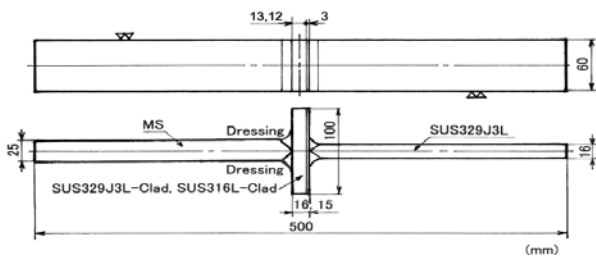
Shape and size of fatigue test specimen (Load-carrying full penetration cruciform welded joint)
